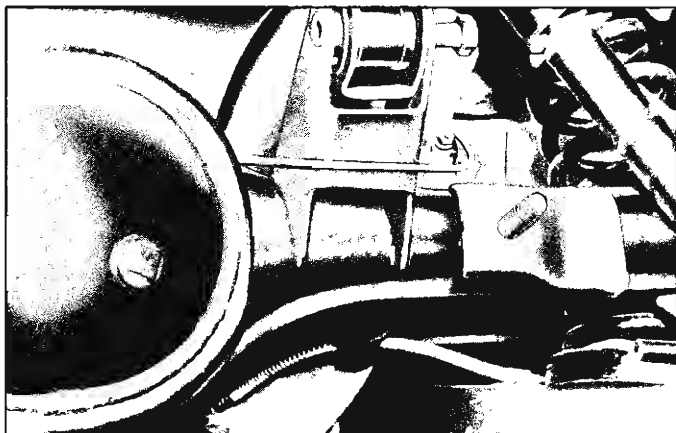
Installing Upper Control Arm to Axle Housing Bracket
